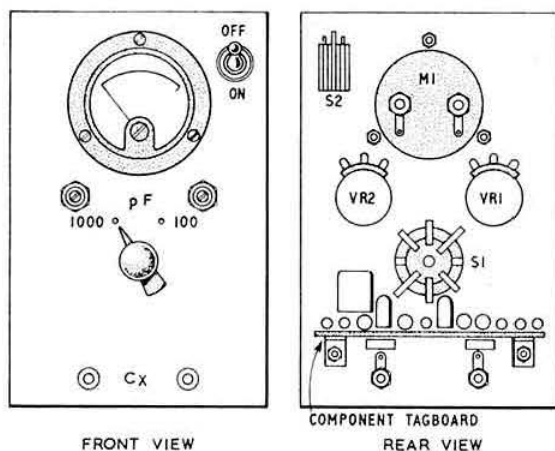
Suggested layout of components and mounting position of component tagboard.
